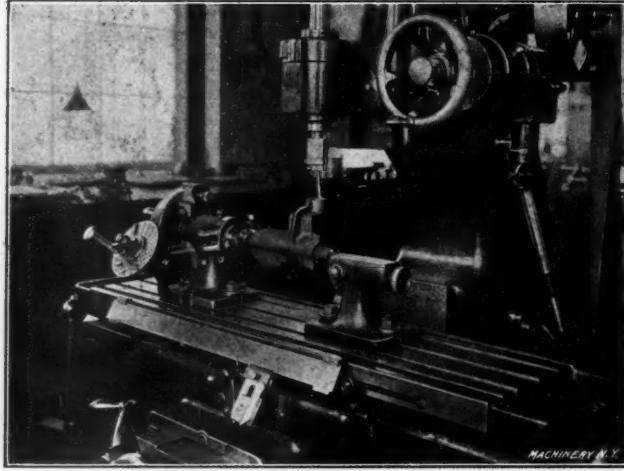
Example of Jig Boring on a Vertical Milling Machine
